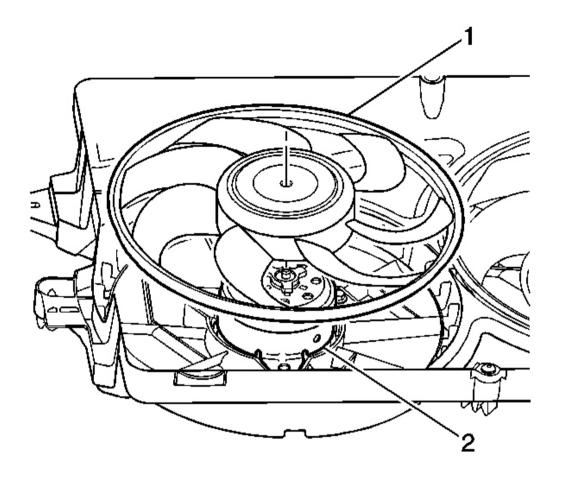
View Of Fan From The Motor Courtesy of GENERAL MOTORS CORP.
